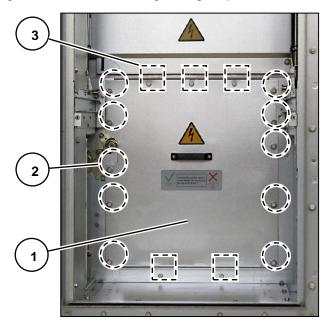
All panel versions except for contactor panels with panel width 435 mm and switch-disconnector panel: 15 bolted joints on partition
